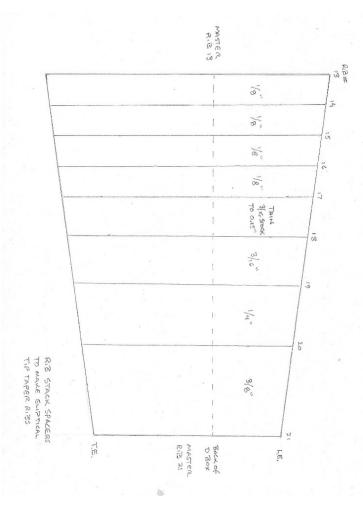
Rib stack dimensions to make elliptical taper tip ribs
